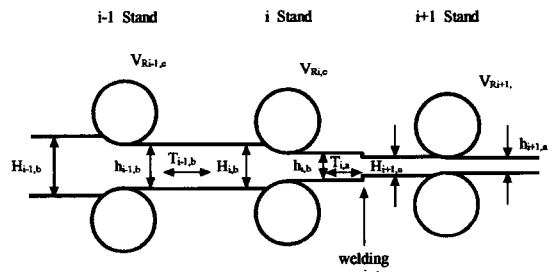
Physical model for endless hot rolling process when the welding point is between i-th stand and (i+1)th stand
